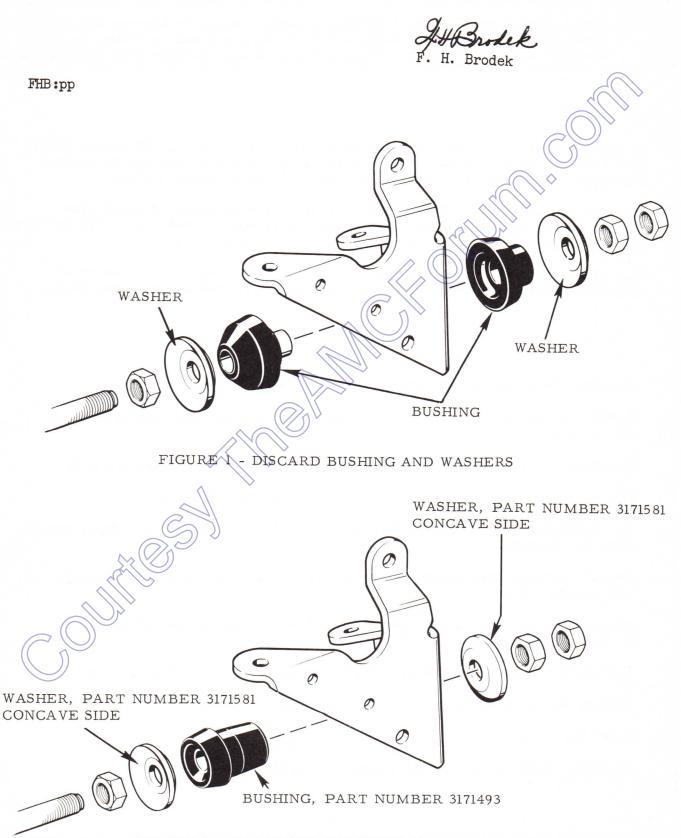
ONE PIECE BUSHING ASSEMBLY SEQUENCE
